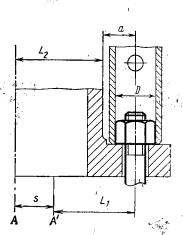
Tightening a countersunk Fig. 190. Determining distance a nut with solid box spanner
